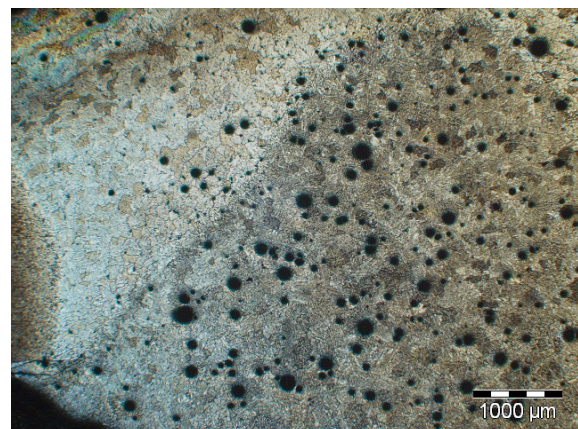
Macrostructure of the MIG welded AA6082-T6.
